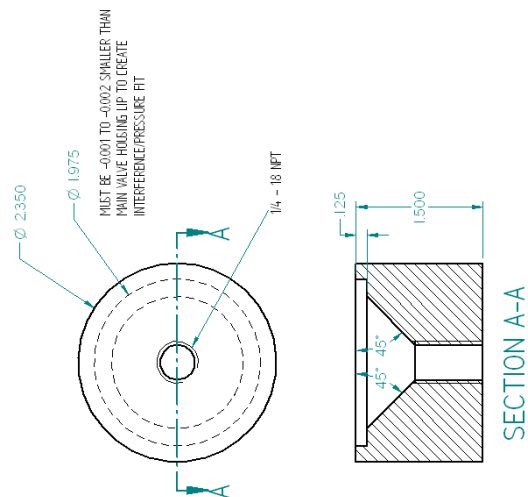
Main housing piece (steel), press fit and welded to previous housing piece.
